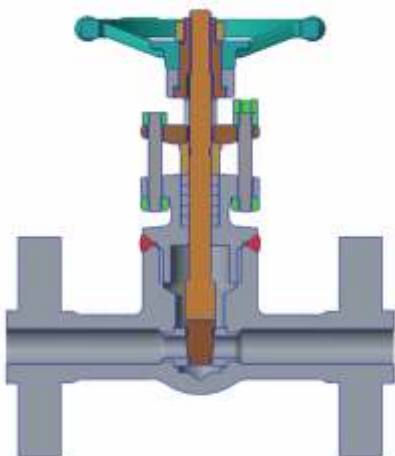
Screwed, Welded Bonnet, Rising Stem
